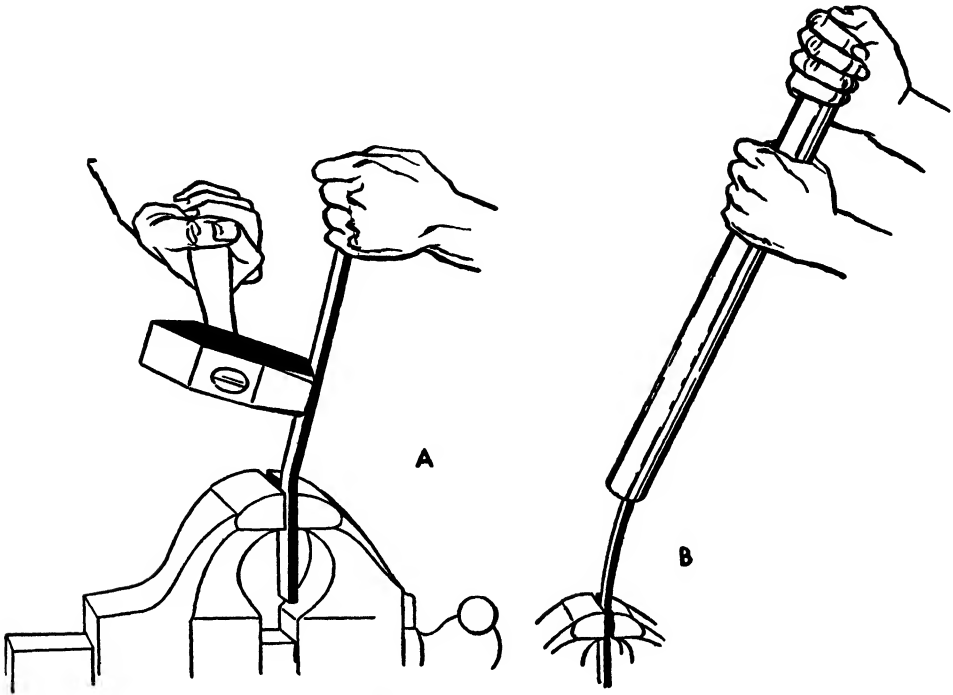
Short bars or bars too heavy to be bent by hand may be bent by hammering, as at A, or by pulling on a pipe slipped over the end, as at B.
